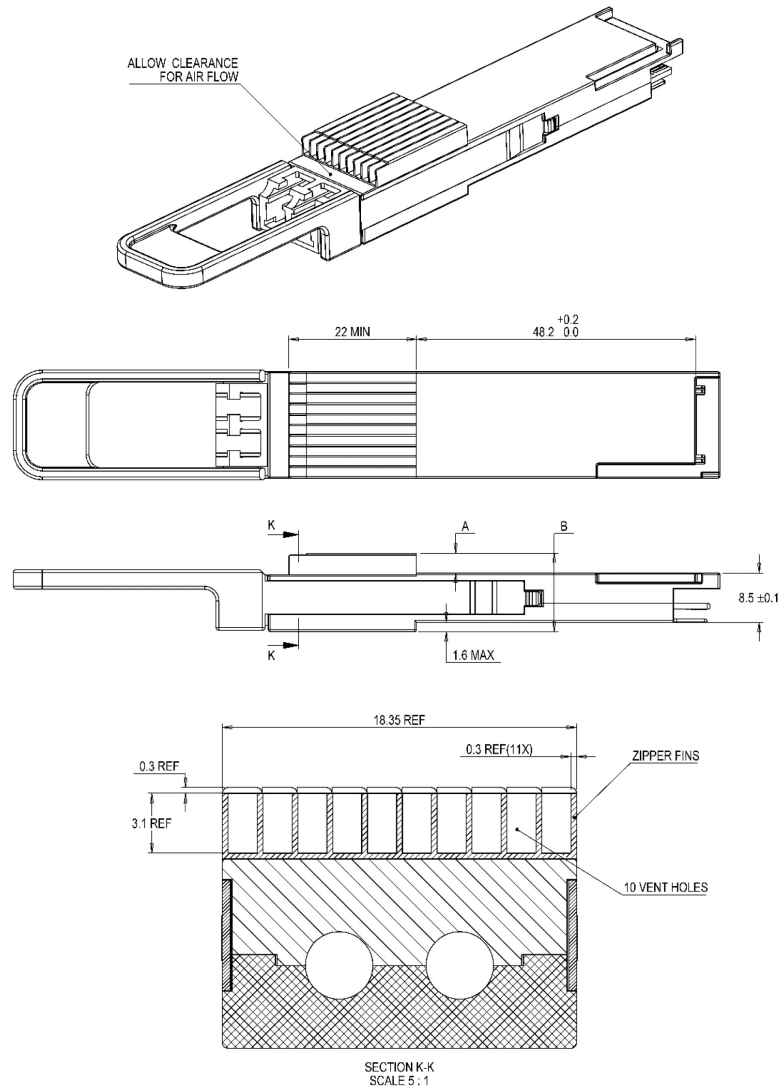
Type 2A and 2B examples of zipper Fin Heat Sink Example
